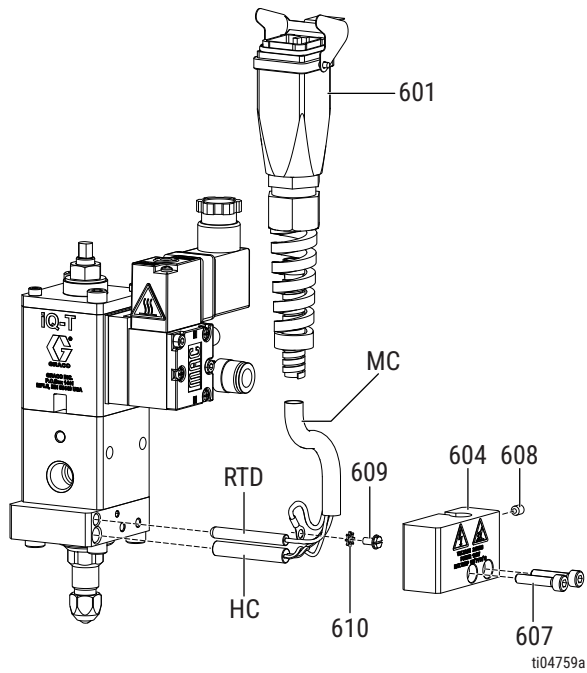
Heater Assembly for 0 mm Outlet Block
